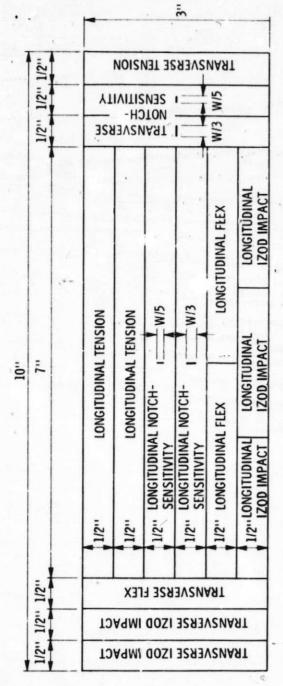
Typical specimen layout plan. (Nominal dimensions.)
